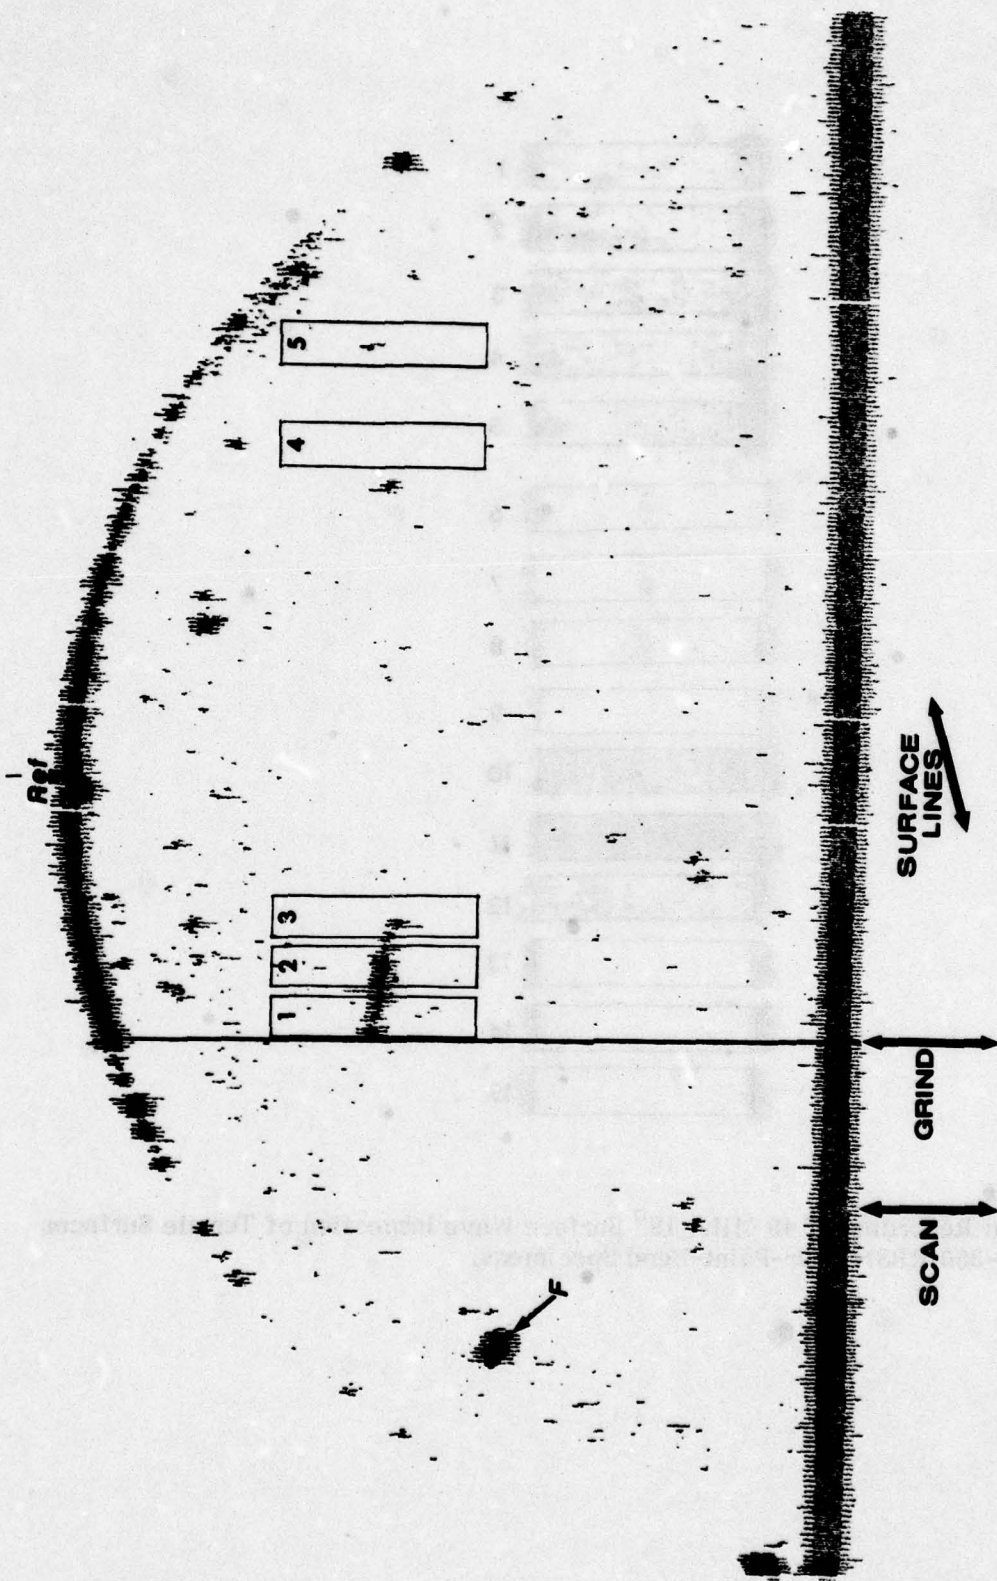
Layout of Four-Point-Bend Specimens of Top Surface of Partially Machined Segment of Billet of NC-350 RBSN.
